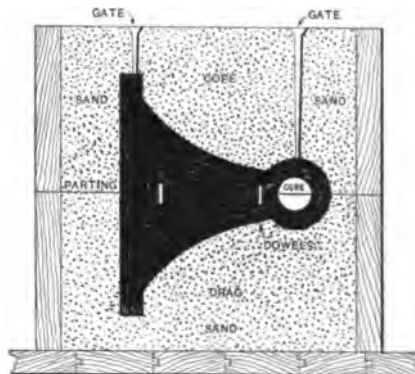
The Equalizer Pattern in the Sand, the Bolt Holes Being Drilled in the Casting.
